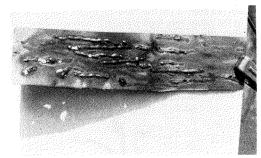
Without going into detail too much, set the machine up as directed with regard to gas flow
